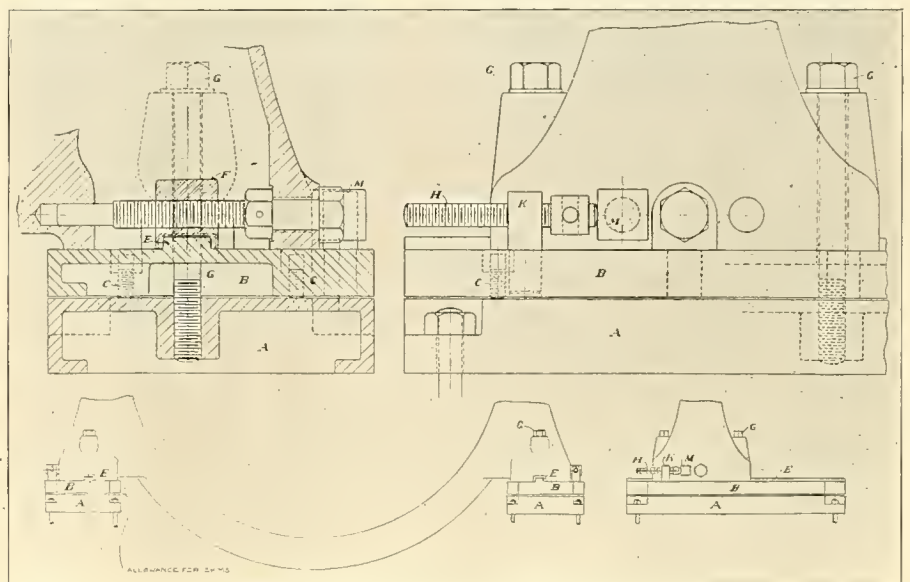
ADJUSTABLE SOLE PLATE OF ALLIS-CHALMERS ALTERNATOR.
